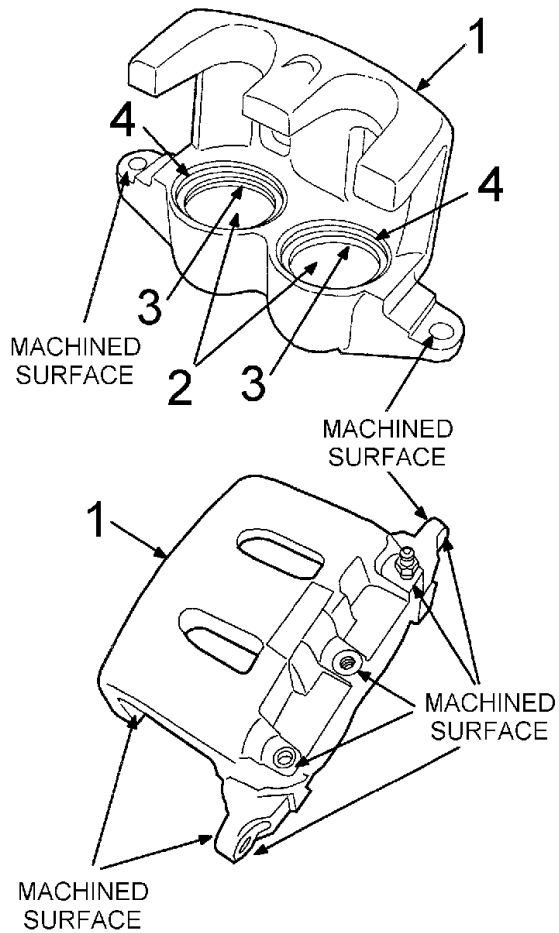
Clean And Inspect Caliper Piston Bores and Machined Surfaces
